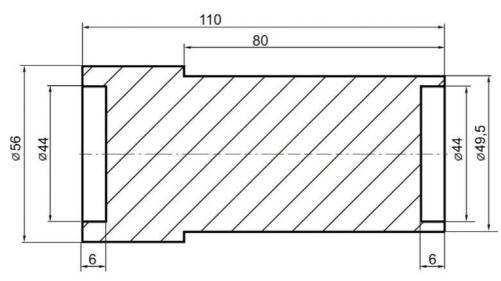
Mandrel for pressing out and pressing in silent blocks of rear springs and brackets (Material - steel 40X (HRC 30-34))
